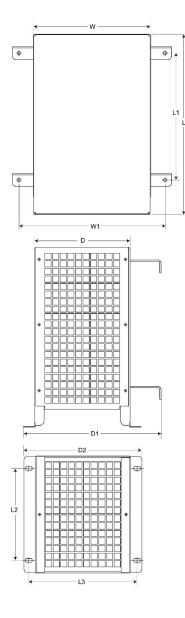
Dimensions of the braking resistors, FSC ... FSF
